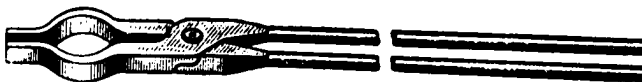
Tongs with flat convex jaws for a catch of shaped aircraft parts .
